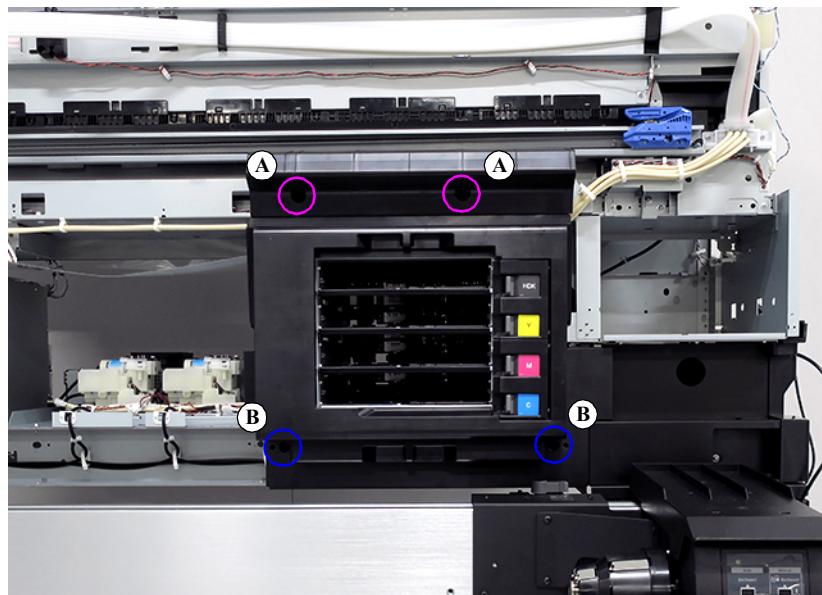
Removing the PAPER GUIDE RIGHT / INK HOLDER RIGHT COVER (1)
